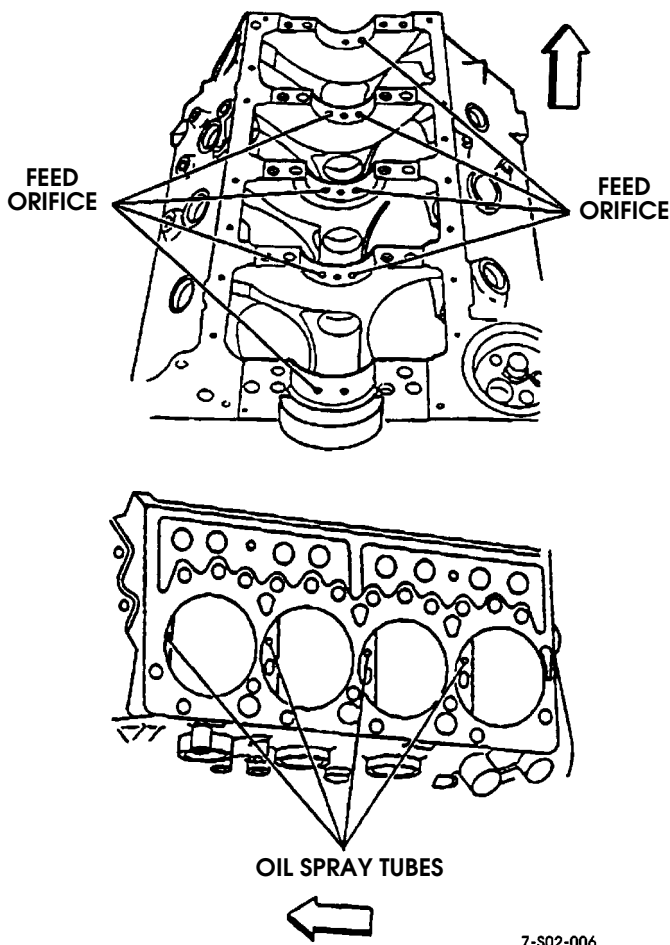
Piston Oil Cooling Feed and Spray Orifice Locations (Turbo Diesel Only)
